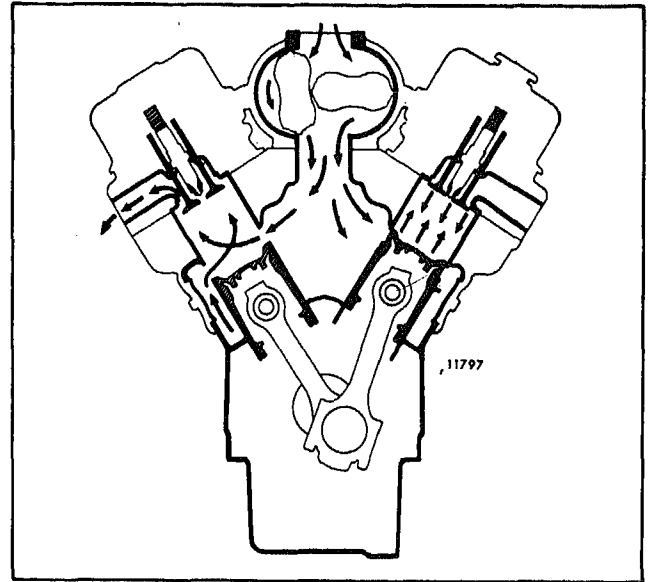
Air Intake System Through Blower and Engine (6V-53 Engine)
